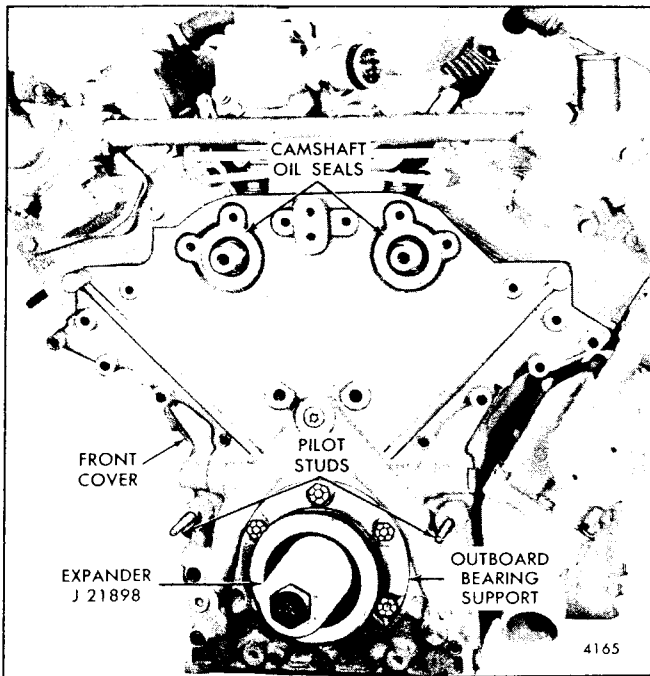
Installing Engine Front Cover - 8V-Engine
